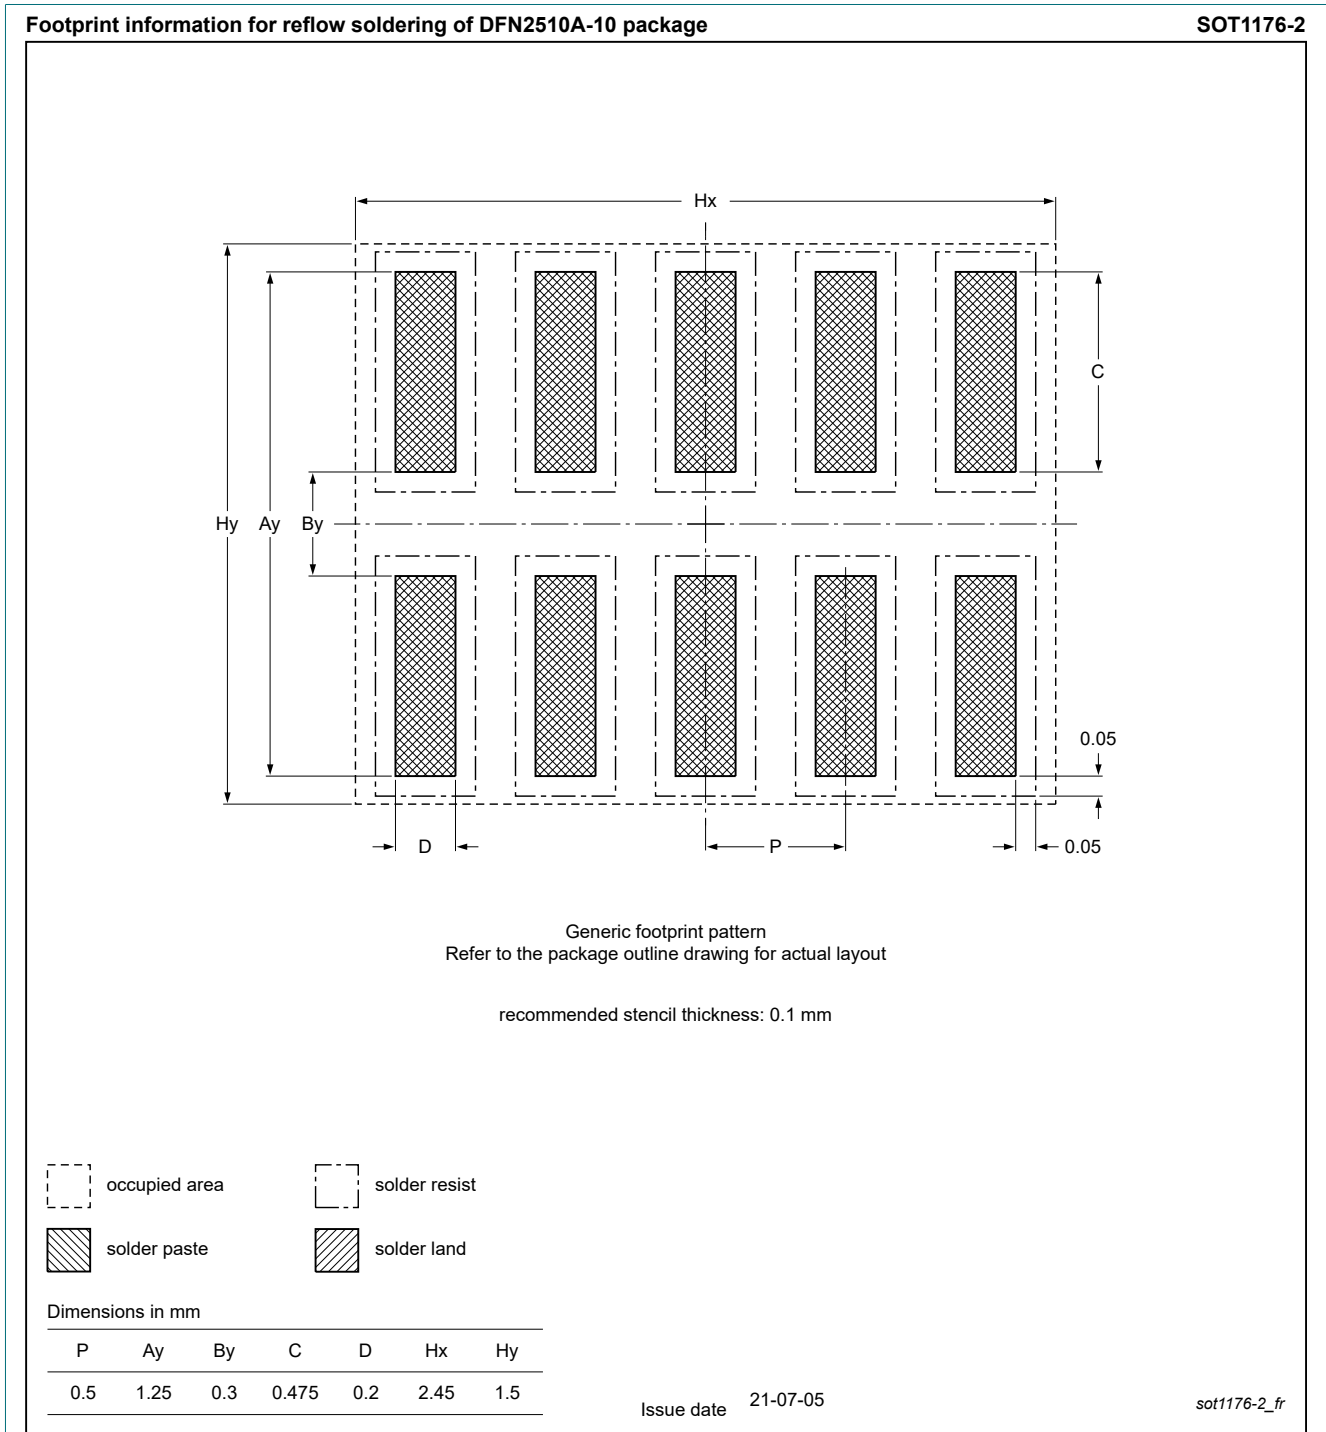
Reflow soldering footprint for DFN2510A-10 (SOT1176-2)
